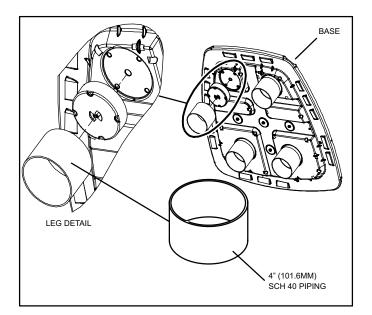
Elevated Slab Mounting using Feet Extenders (Small-Base Units)
